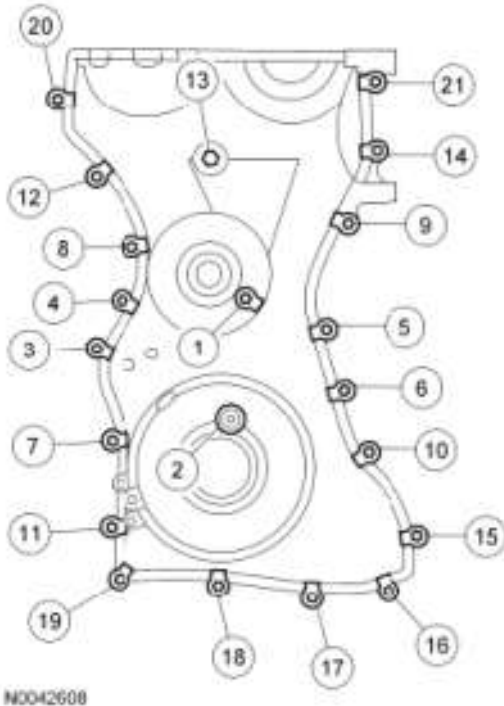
Identifying Front Cover Bolts Tightening Sequence
